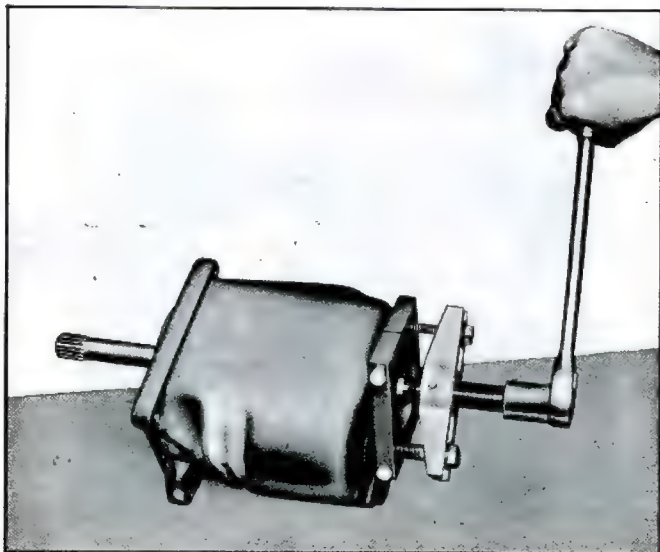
B-5—Removing Clutch Gear Bearing with Puller J-8880
